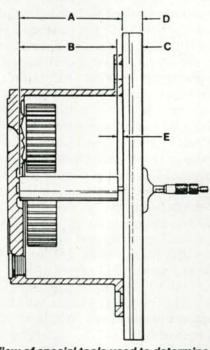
View of special tools used to determine dimension (A) from mounting flange of planetary carrier to seat of thrust washer. Refer to text for procedure.
